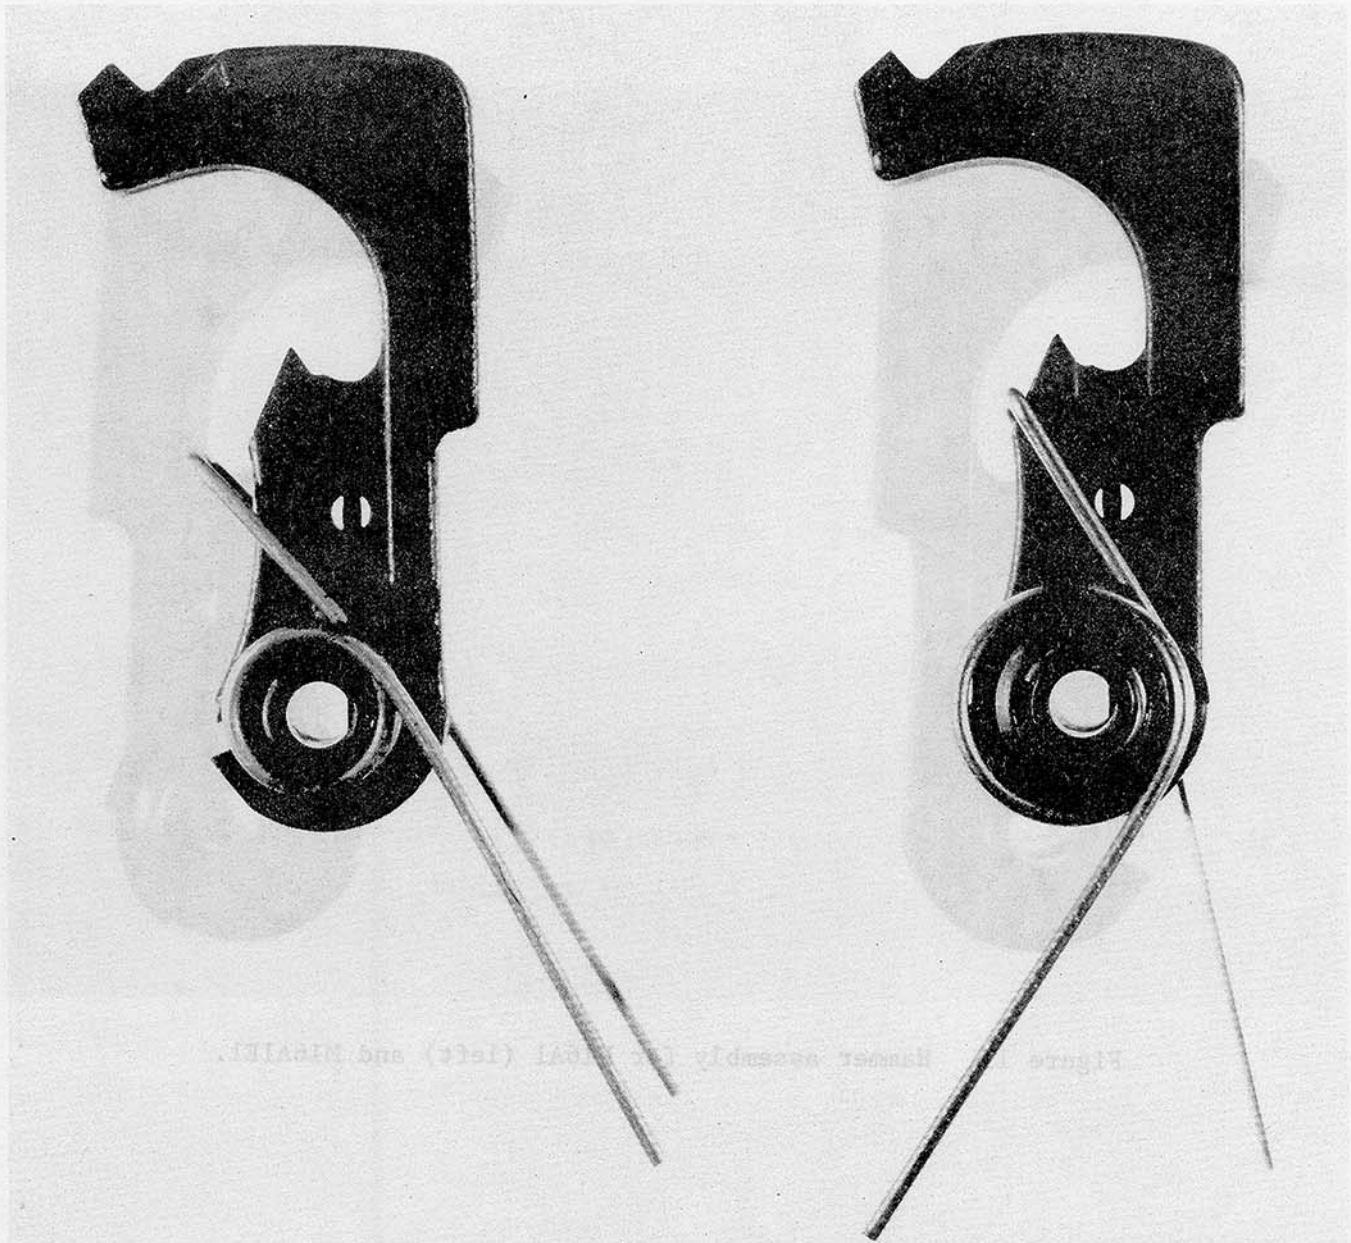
Hammer assembly with hammer spring in place, for M16A1 (left) and M16A1E1.
